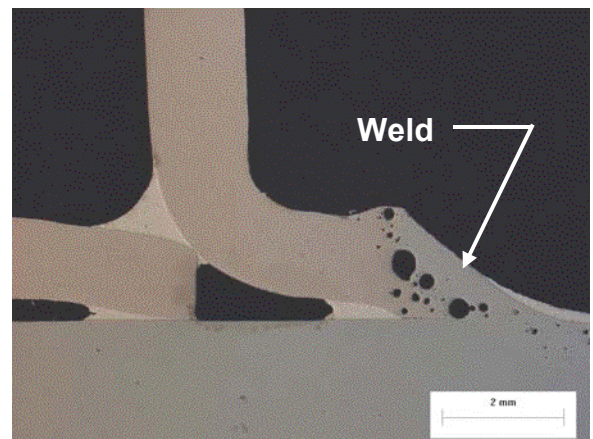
Assembly #5 Braze Joint Voids with Porosity in Adjacent Weld
